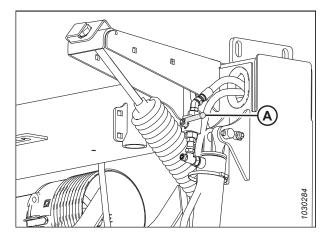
Cylinder Lock-Out Valve – Closed Position
